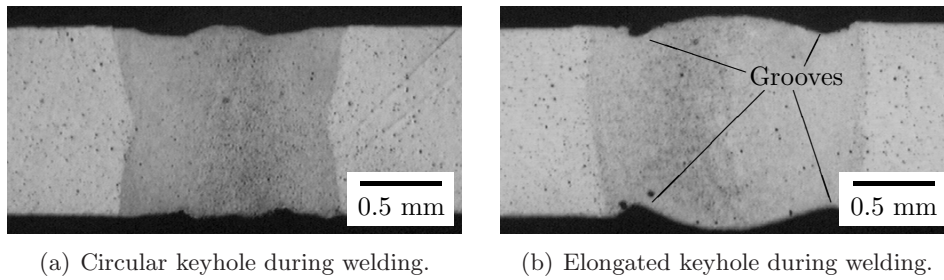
Cross sections of a welded 1.1 mm AA5182 sheet, with different shapes of the keyhole during welding.
